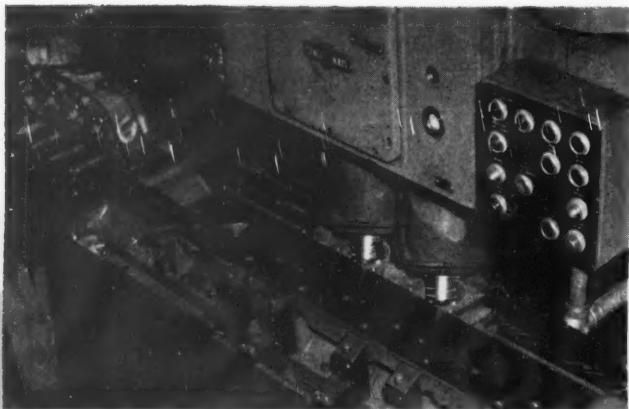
Machining spherical combustion chambers in cylinder head for Chrysler "FirePower" 180-h.p. engine, using a generating-type milling machine.
